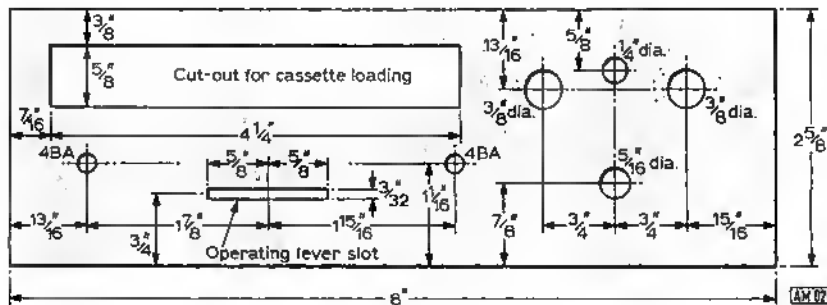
Dimensions and assembly of the metalwork forming the case.
